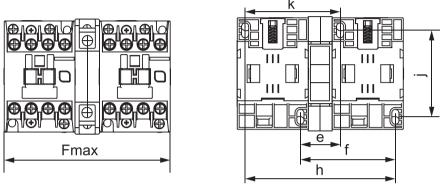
TGC1s-09N~38N outline and installation dimensions drawings
